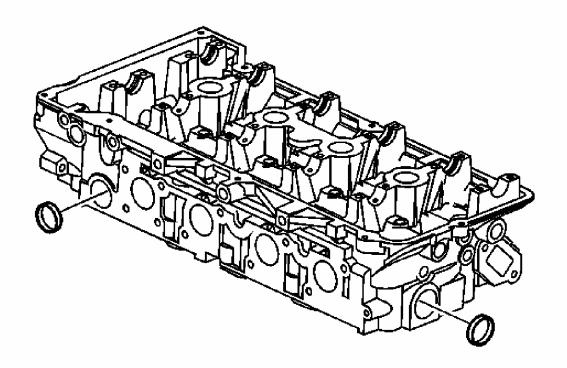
View Of Expansion Coolant Plugs Courtesy of GENERAL MOTORS CORP.
